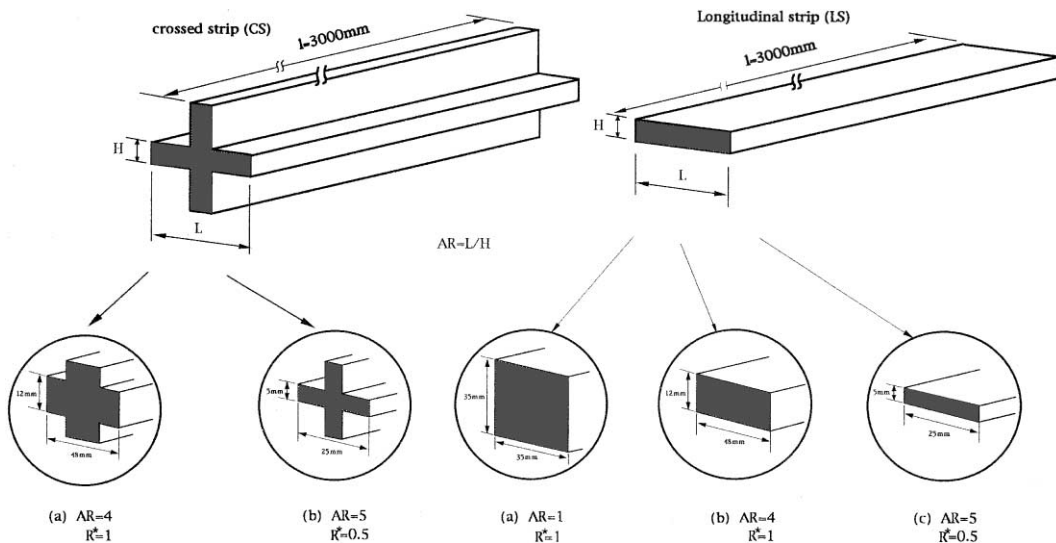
Physical geometry (LS and CS) and dimensions of the inserts considered.
